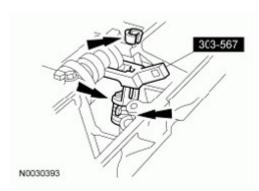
Installing Valve Stem Seal Courtesy of FORD MOTOR CO.
